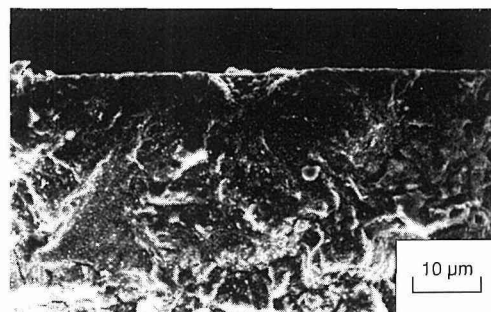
A typical example of fatigue crack initiation on the fracture surface of A533B steel in high temperature water
